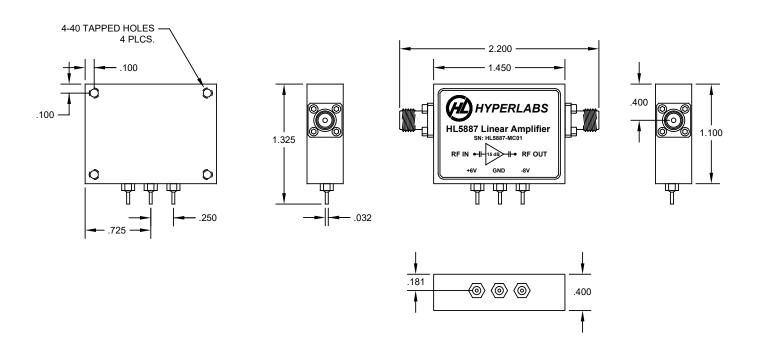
HL5887 mechnical drawing (opt. -29-JJ), inches
